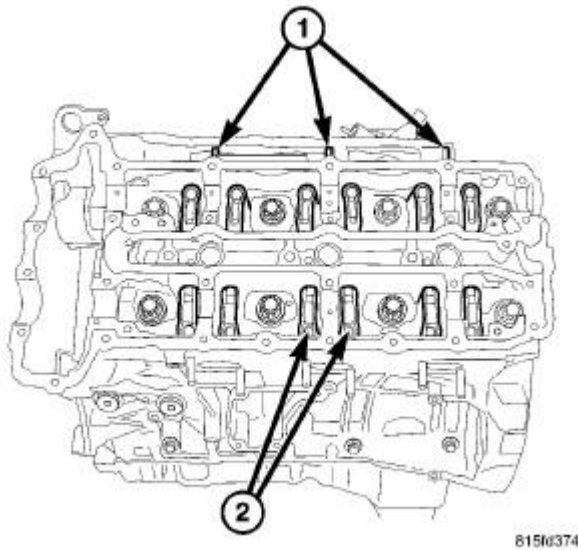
TAPPET/CAMSHAFT FOLLOWER POSITION
